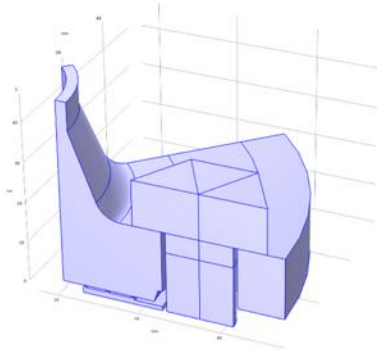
3D model of 1/8 part of bolted flange joint gasketed with DVS with M16 hex bolt
